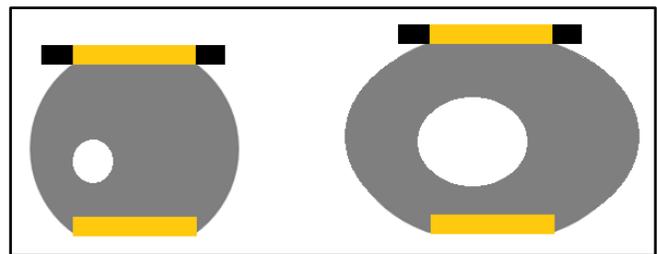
Graphics showing possible void formation in bumped solder joints. Large voids may significantly increase solder joint height and diameter. Voids may grow and shrink without escaping the solder [12].
